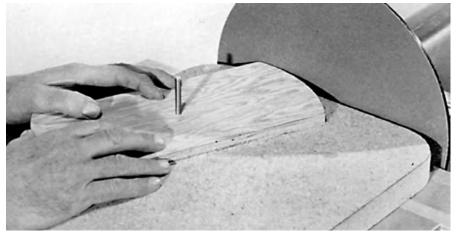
The pivot guide method can also be used to round off the ends of straight pieces.
